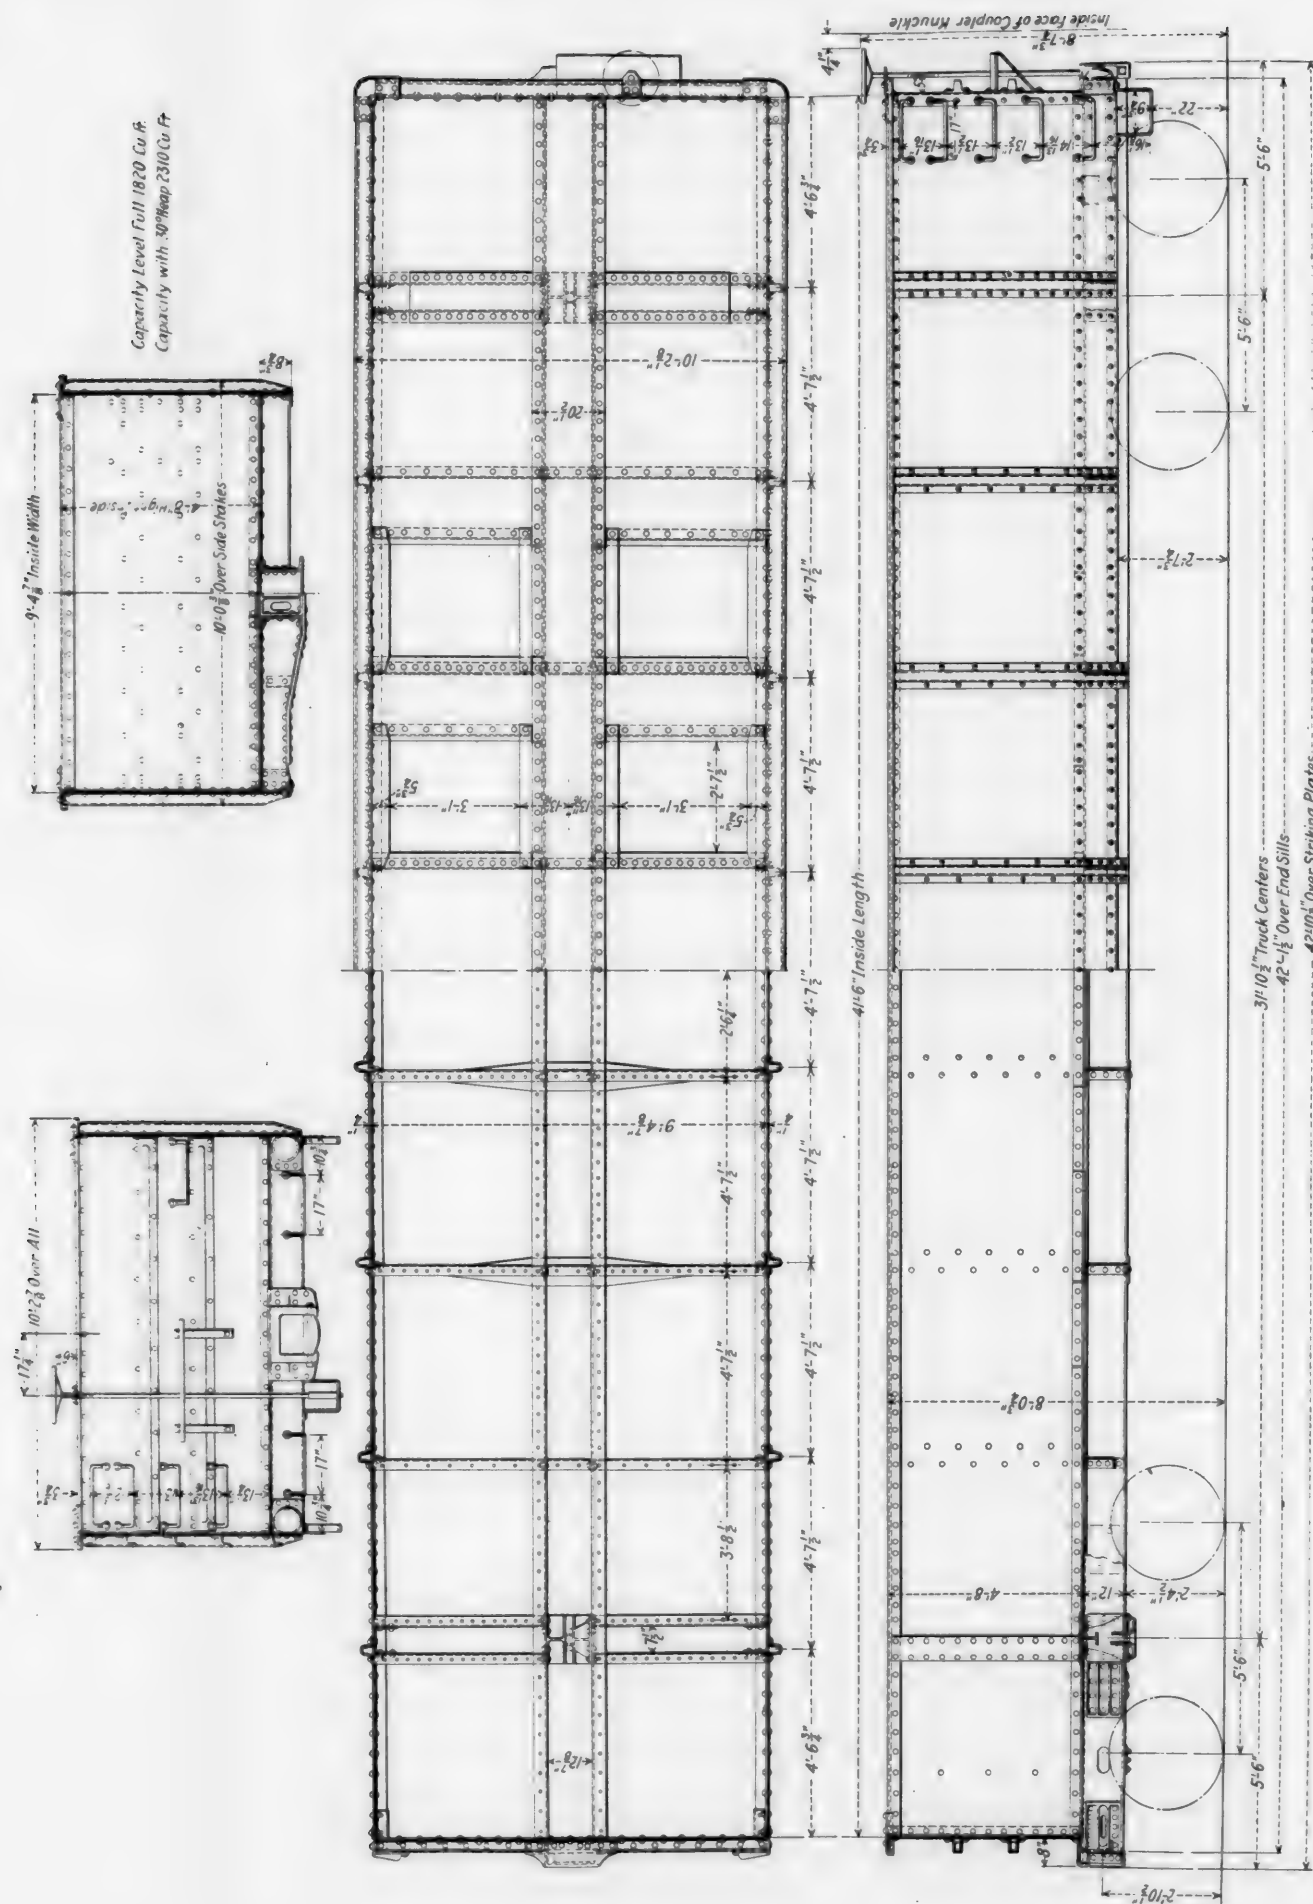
General Plan of the Standard 50-Ton Steel Gondola Car
